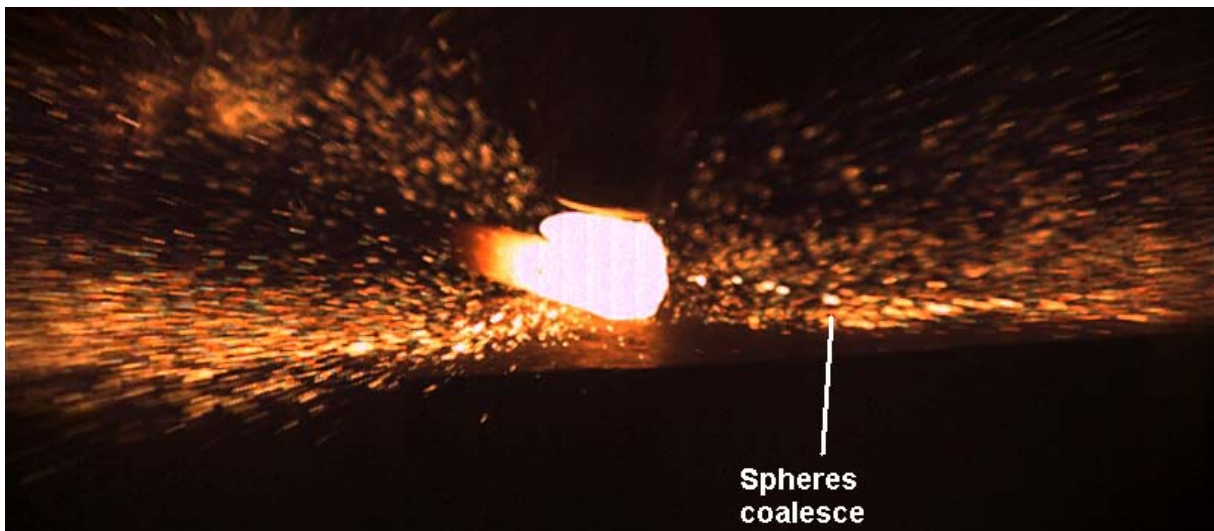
Welding experiment 16. Still from the high-speed digital camera 16 frames after the impact
